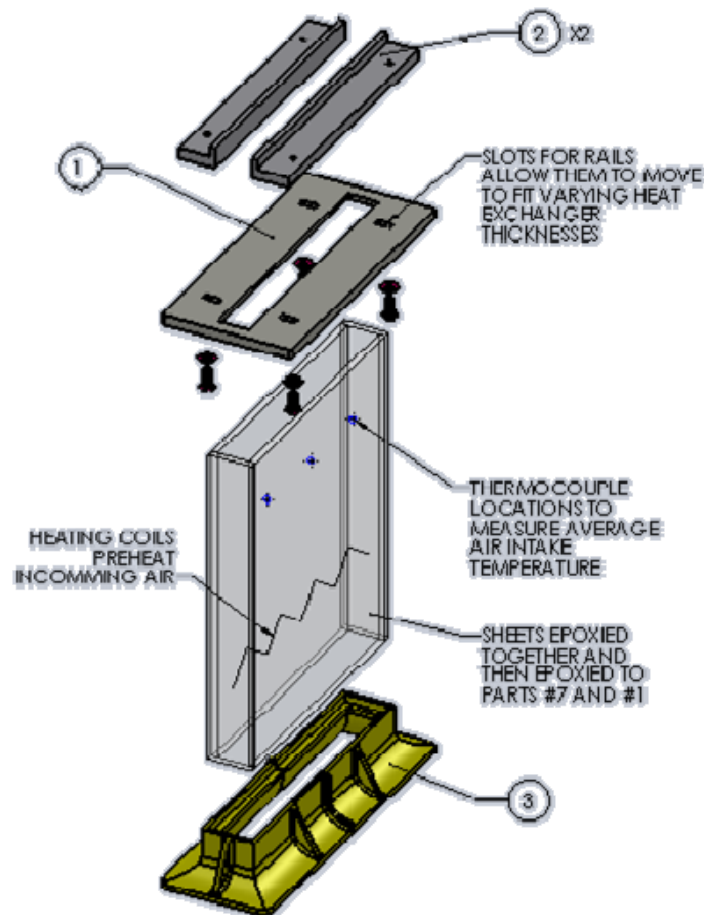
Bottom Cover Assembly (Drawing T400)
